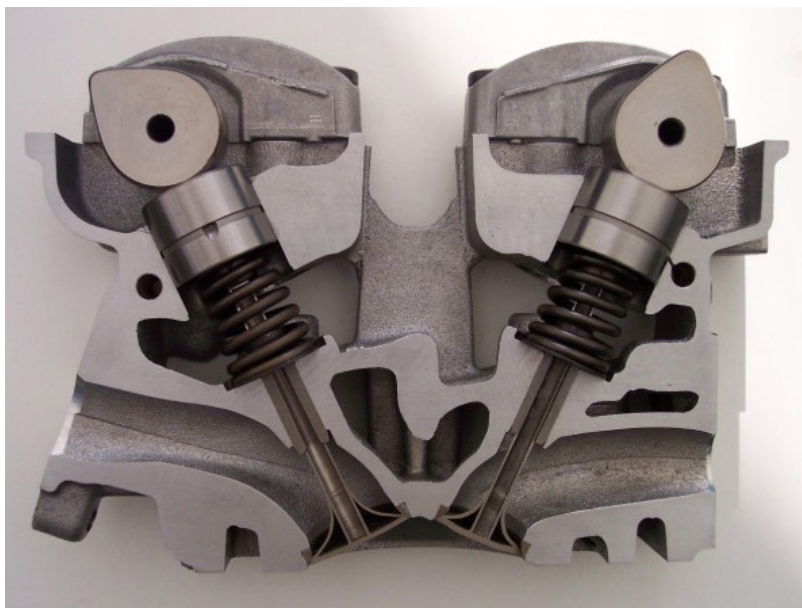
Double Over Head Camshaft valve train system [3]
